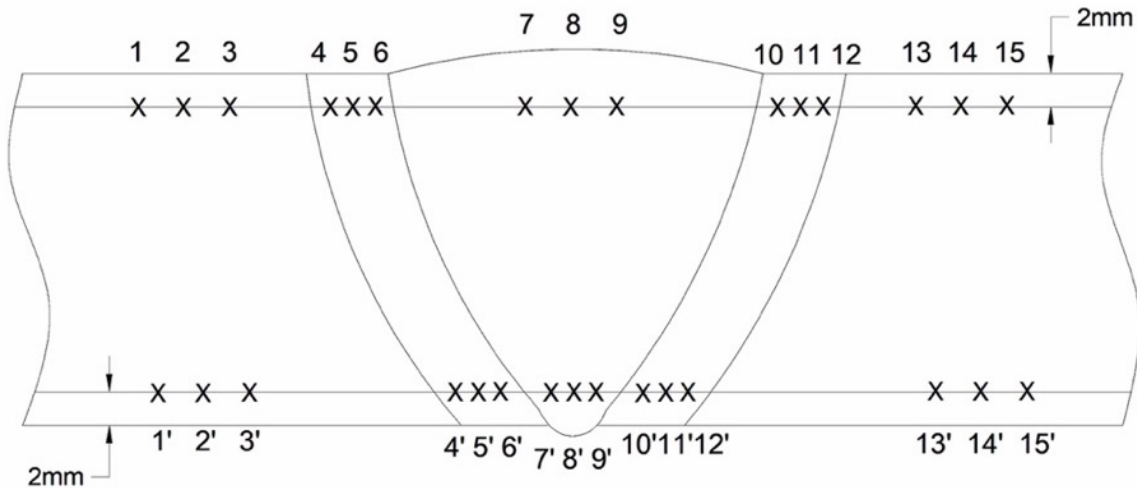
Arrangement of hardness measurement points in cross-section on the weld face and weld root
